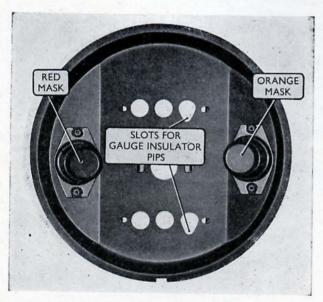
View of combined instrument case showing location of ignition/generator warning lamp mask on left, and oil warning lamp mask on right
